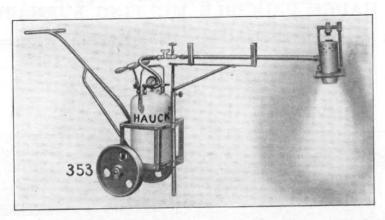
Portable hand pump type outfit mounted on truck especially suitable for heating ladles.
